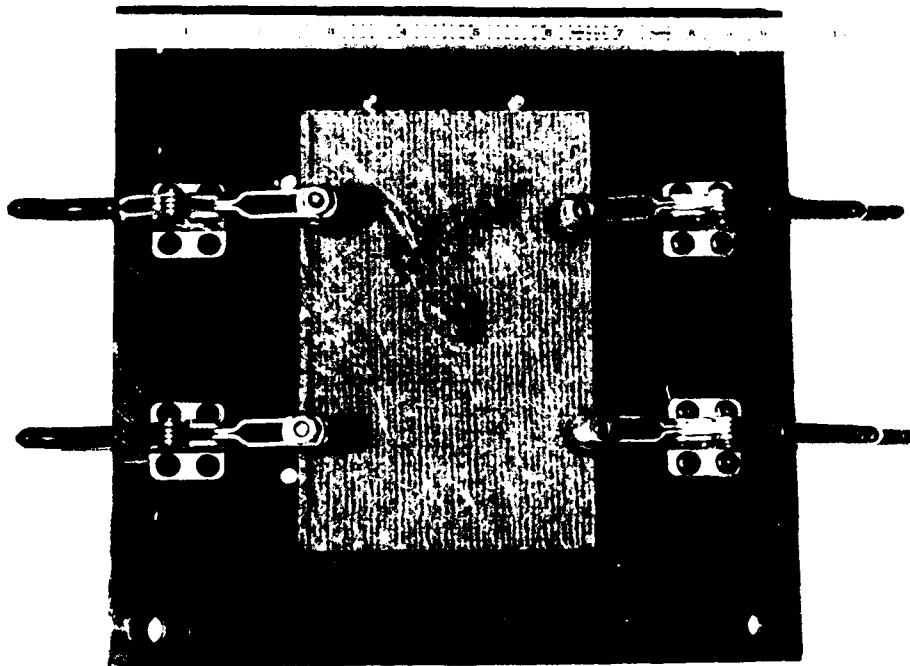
The Boeing Model 7260 support fixture with a sample in place.
